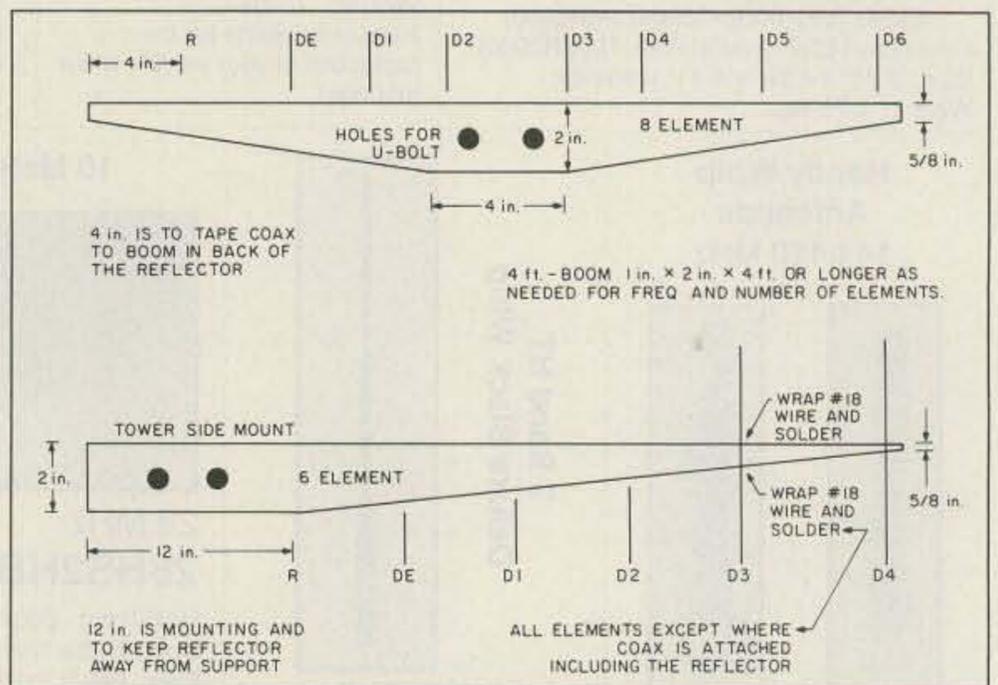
Boom dimensions and element locations. Although not required, you can taper the boom as shown to lighten the total weight of the antenna.
